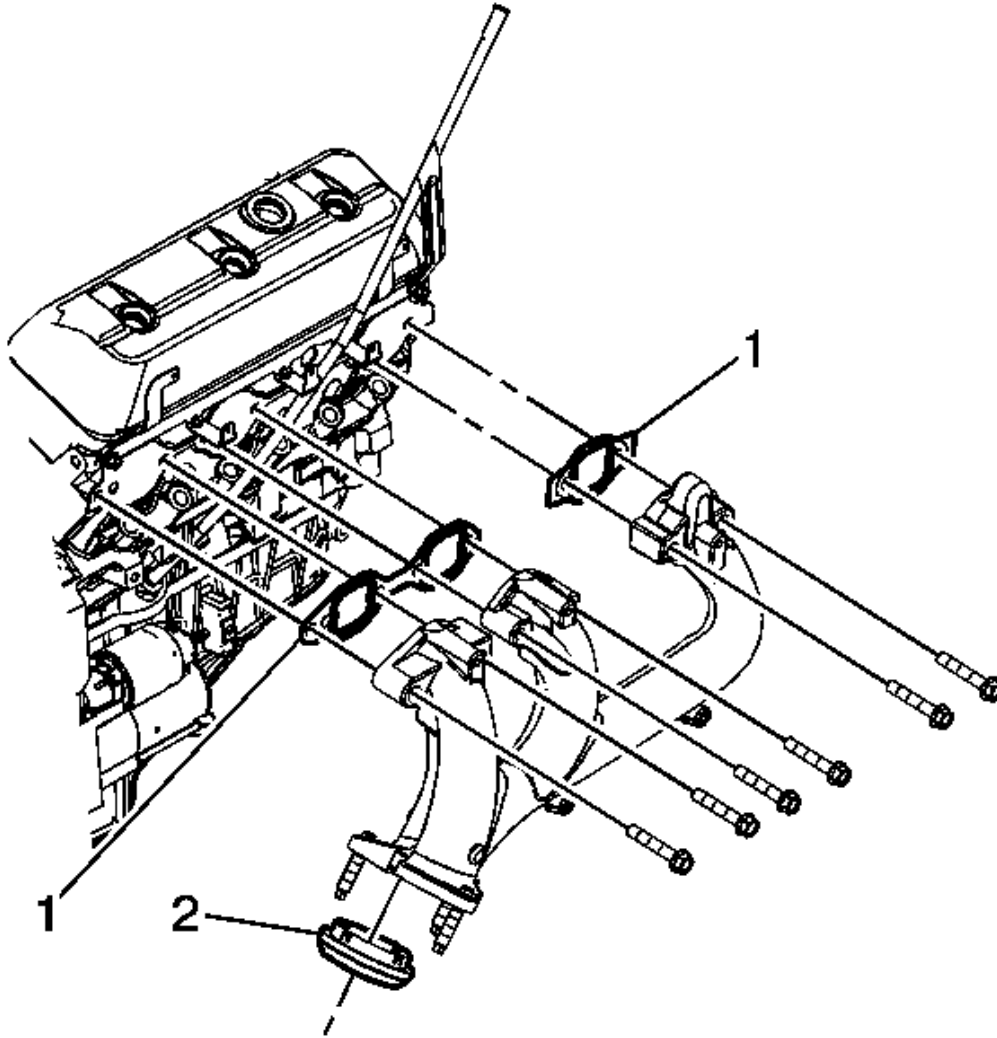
View Of Catalytic Converter Seal & Exhaust Manifold Components
